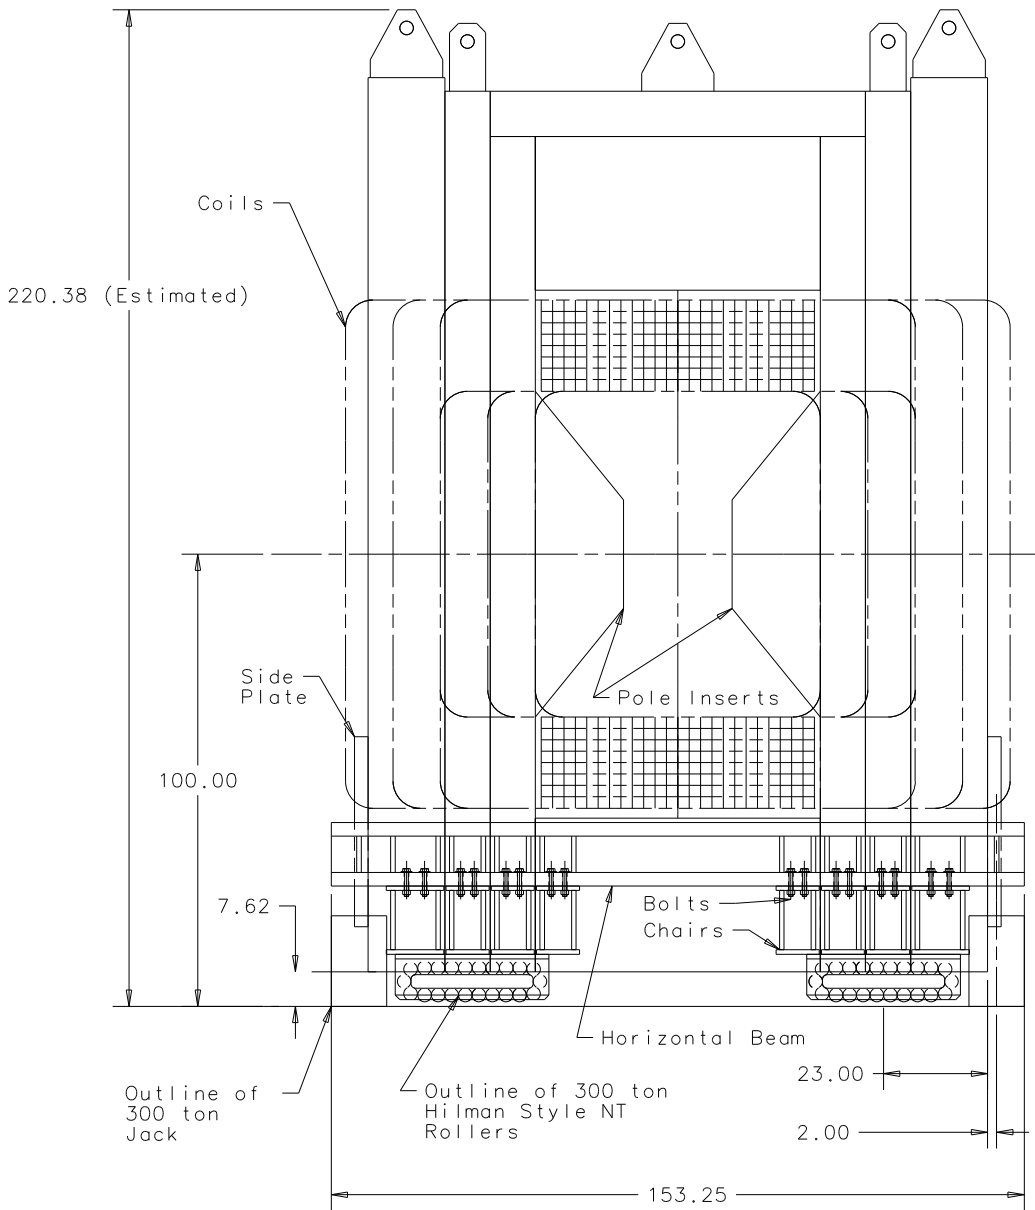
Cross section of the BTeV Vertex Magnet (modified SM3 dipole) with rollers and pole piece inserts. All dimensions are in inches.
